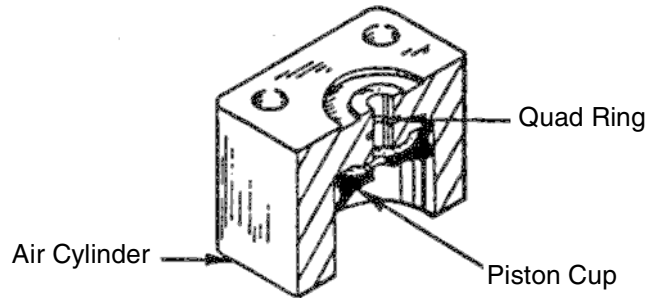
Positioning the Quad Ring in the Air Cylinder
